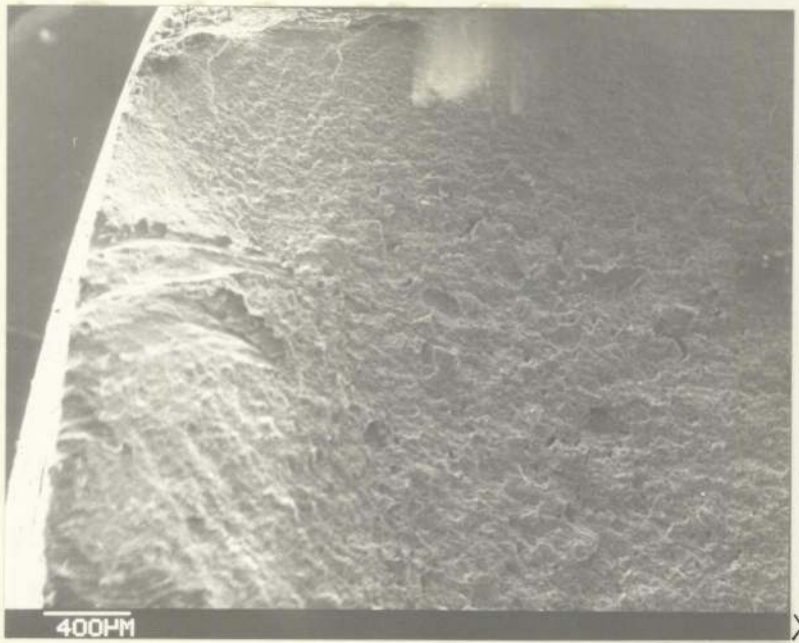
S.E.M. fractograph showing a mixture of dimples and tearing near the notch root of a hard Cr plated No.5 die steel impact testpiece.
